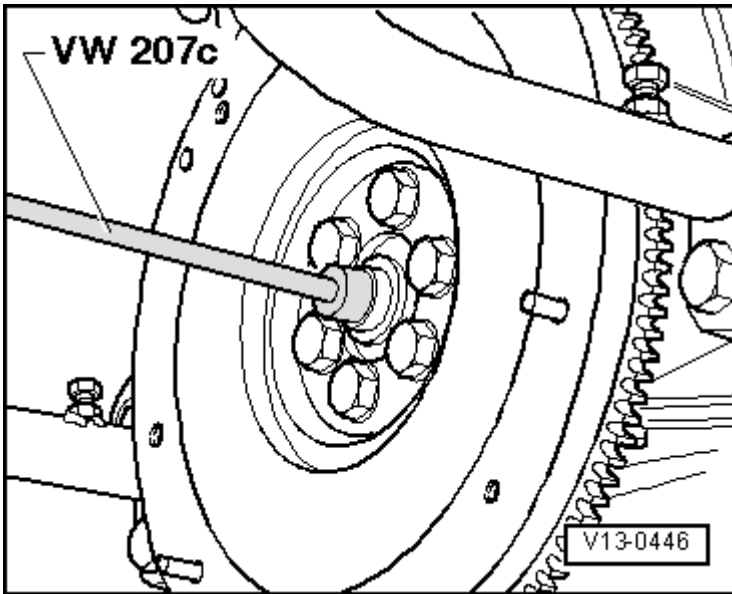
Identifying Needle Bearing Driven In Using Drift VW 207 C
